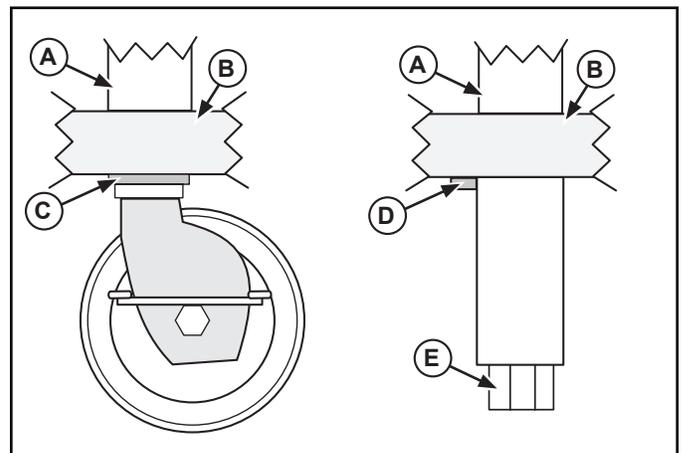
Shelf, Leg, Caster Wheel and Adjustable Feet.
